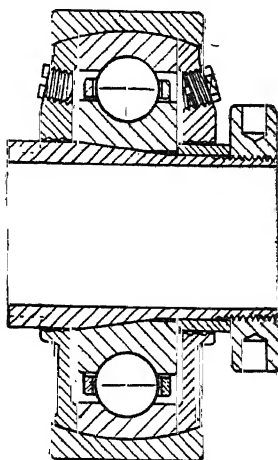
The single-row self-aligning wide-type ball journal bearing with taper sleeve and nut.
